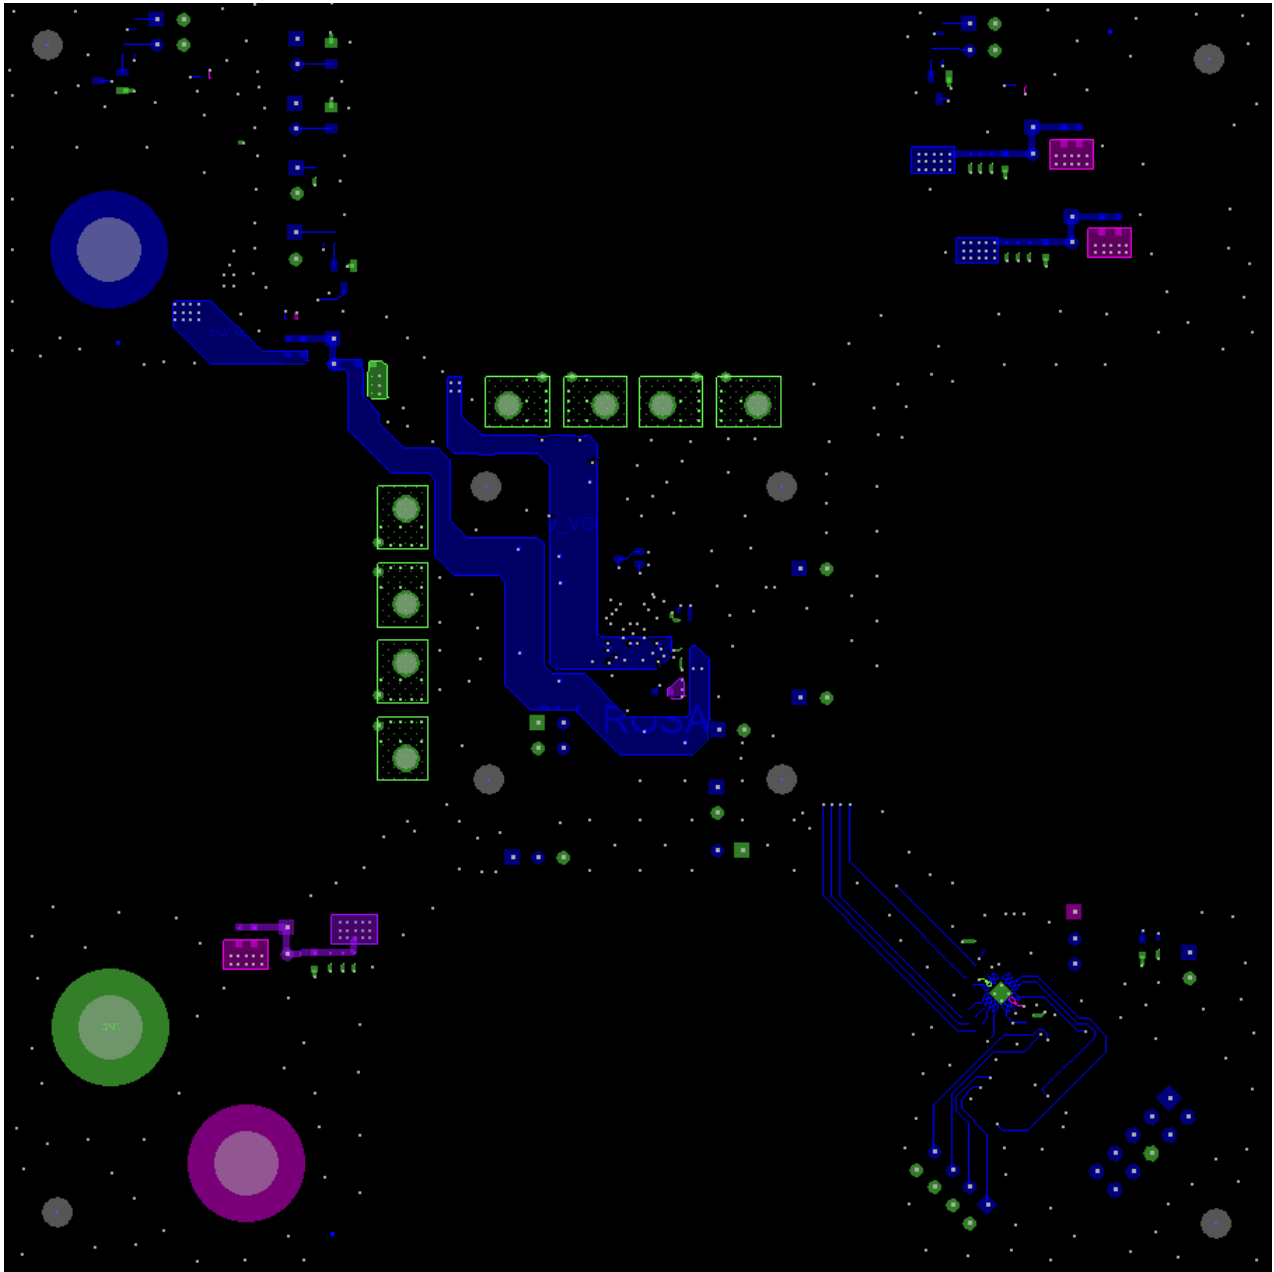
ONET1130EC-EVM Bottom Layer PCB Layout
